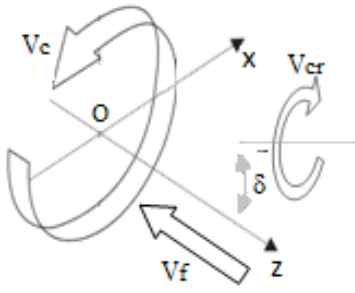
Unconventional kinematic scheme when turning with a rotary tool
